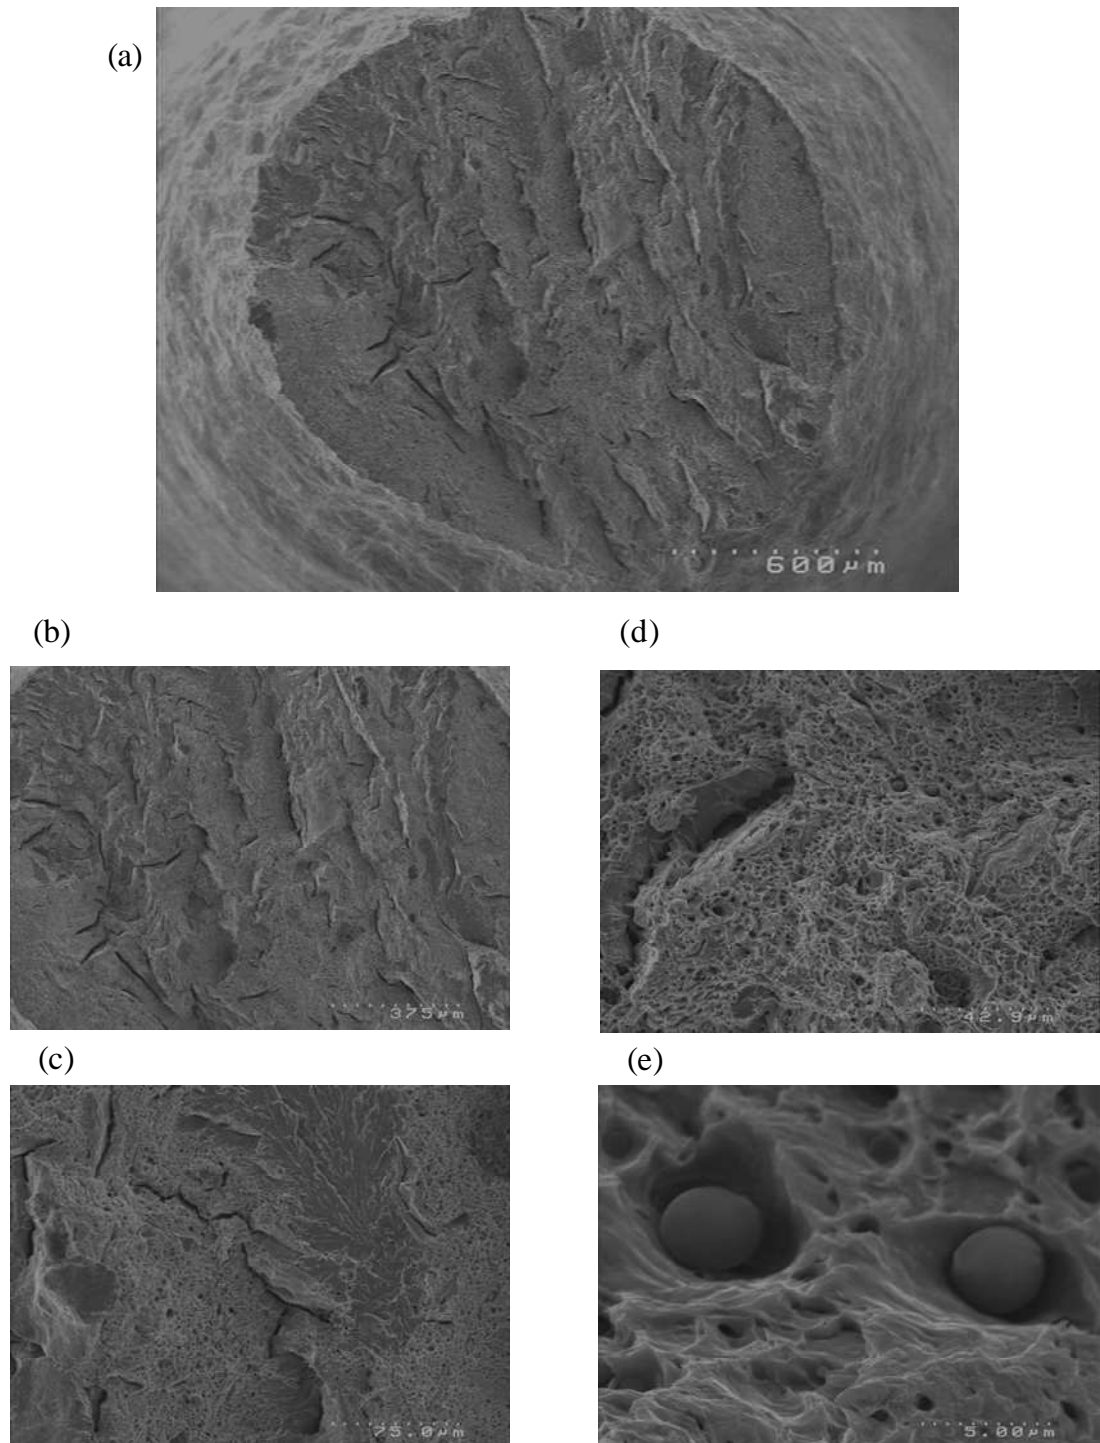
Typical fracture surface of tensile specimen for the RH weld metal tested at -160°C ; (a) fracture surface showing quasi - cleavage fracture; (b) magnification of microvoid coalescence; (c) magnification of inclusions.
